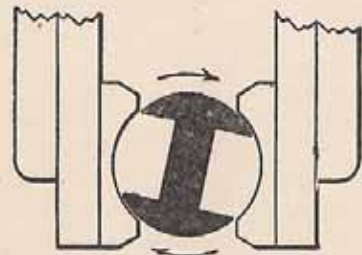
POSITION OF MAGNETO ARMATURE WHEN CONTACTS SHOULD OPEN
